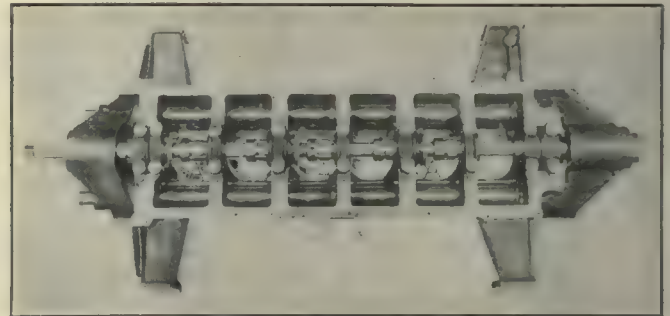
METHOD OF USING REAMERS IN A CRANK CASE
